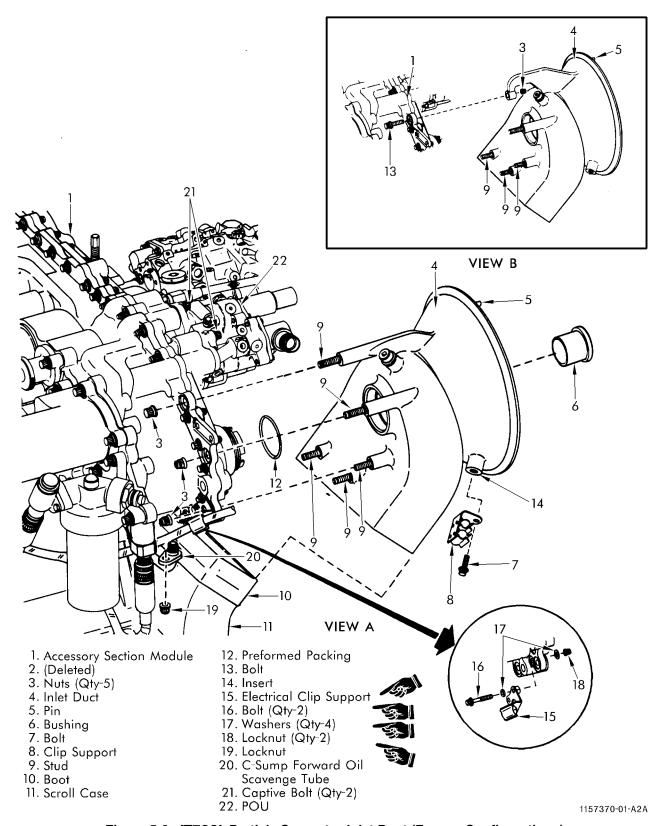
(T700) Particle Separator Inlet Duct (Former Configurations); Removal, Inspection, and Installation
